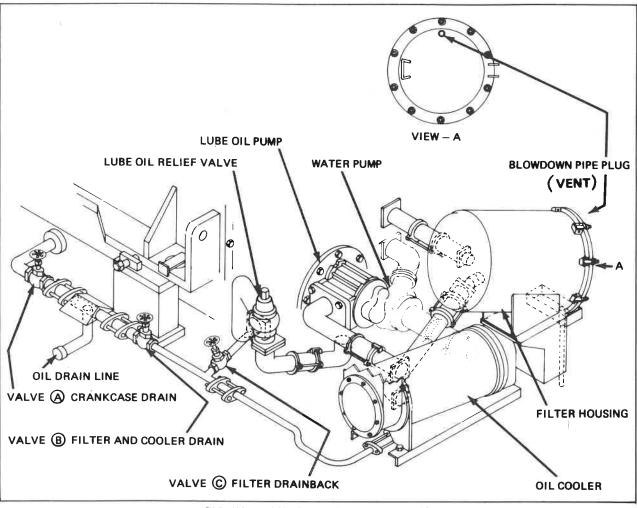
LUBE-OIL PIPING DIAGRAM.
